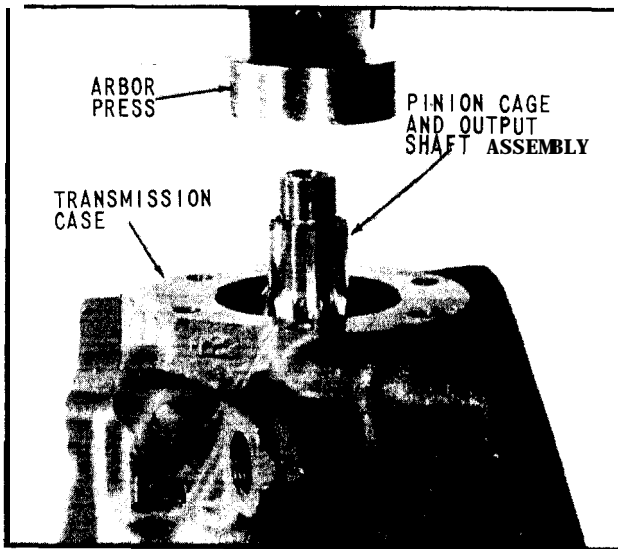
Case Assembled over Pinion Cage and Output Shaft Assembly and Assembly Tool
